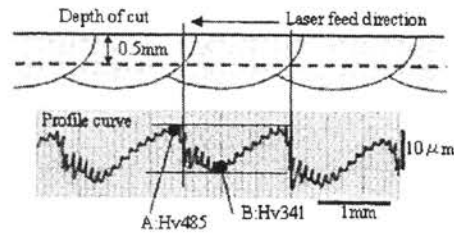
Illustration of contact of cutting tool and work piece after heat treatment with CO₂ laser
